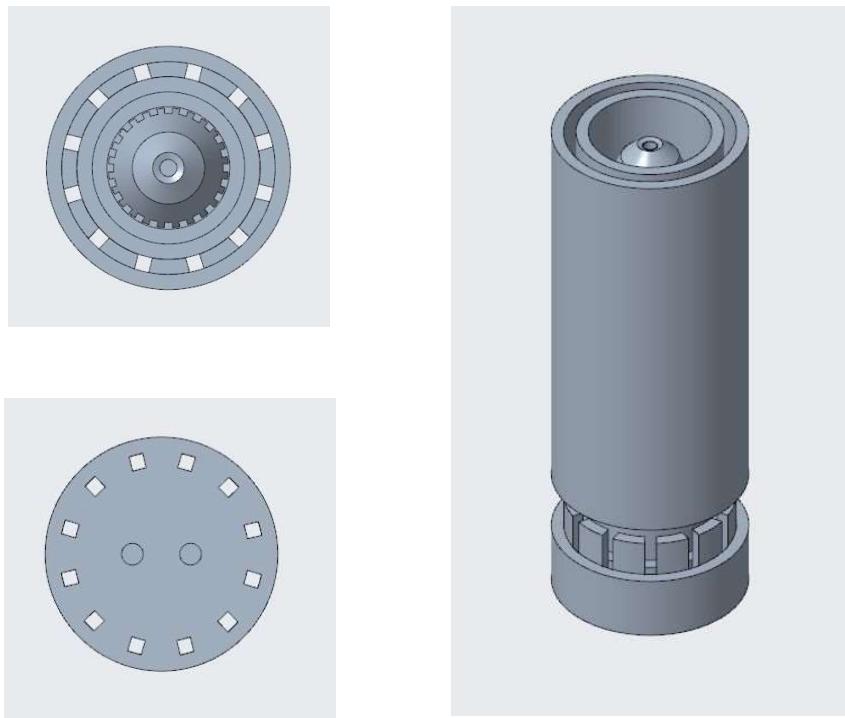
Plasma head: (top-left) front view; (bottom-left) rear view; (right) isometric view
